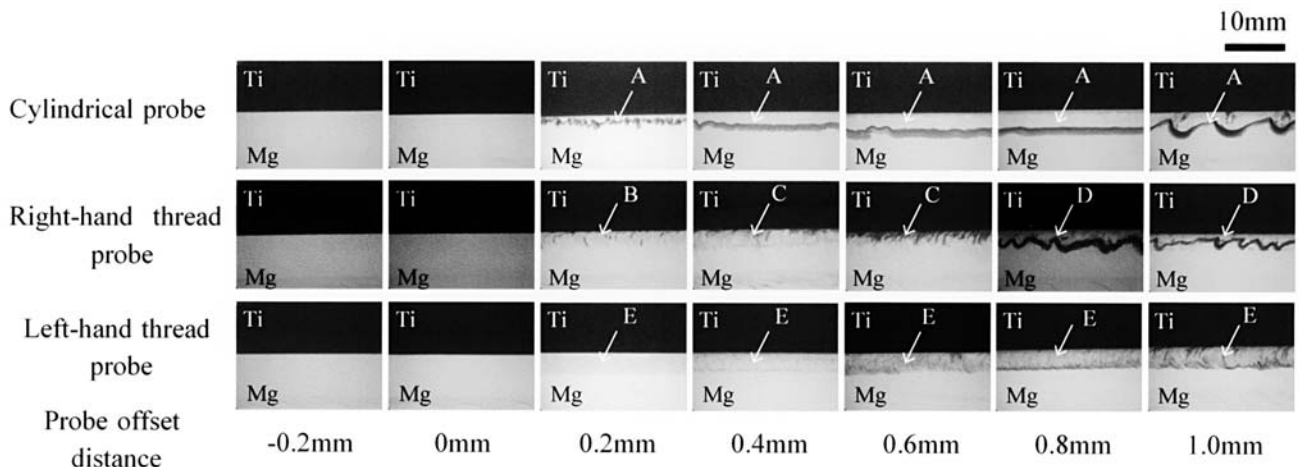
X-ray photographs of the welded joint using a cylindrical probe and a probe with thread under the various probe offset distances.
